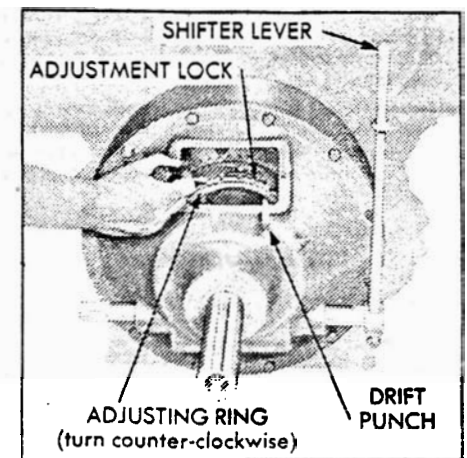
, VG4D, V465D ROCKFORD CLUTCH ADJUSTMENT
